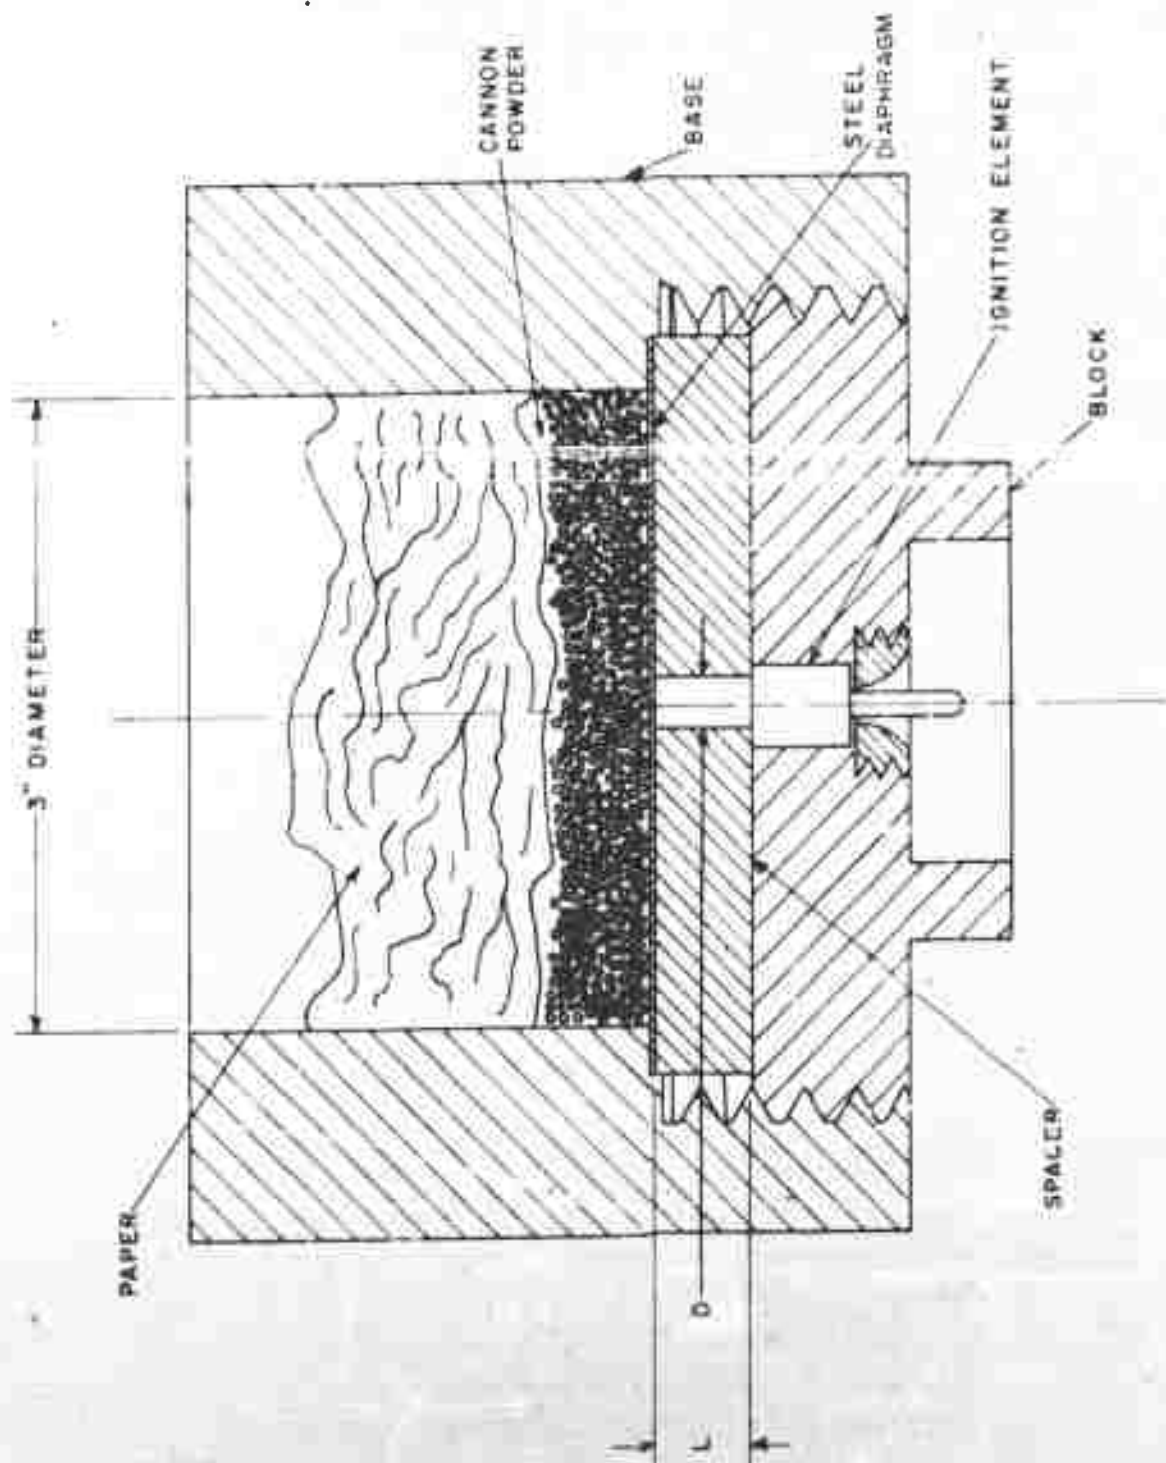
DIAPHRAM OUTPUT TEST FIXTURE FOR IGNITION ELEMENT
